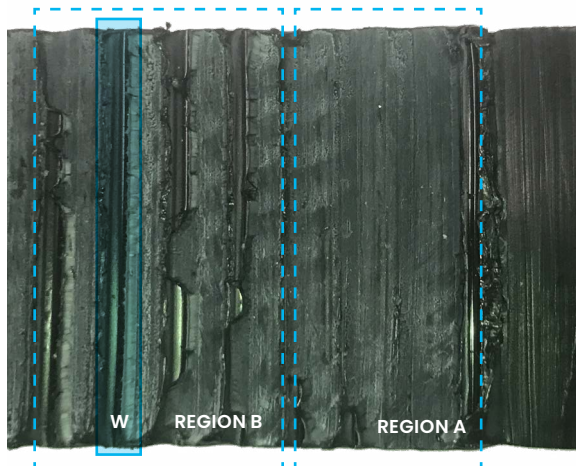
is a close-up of the pipe fusion interface exhibiting mixed mode failures – ductile and brittle / lack of fusion zone.
